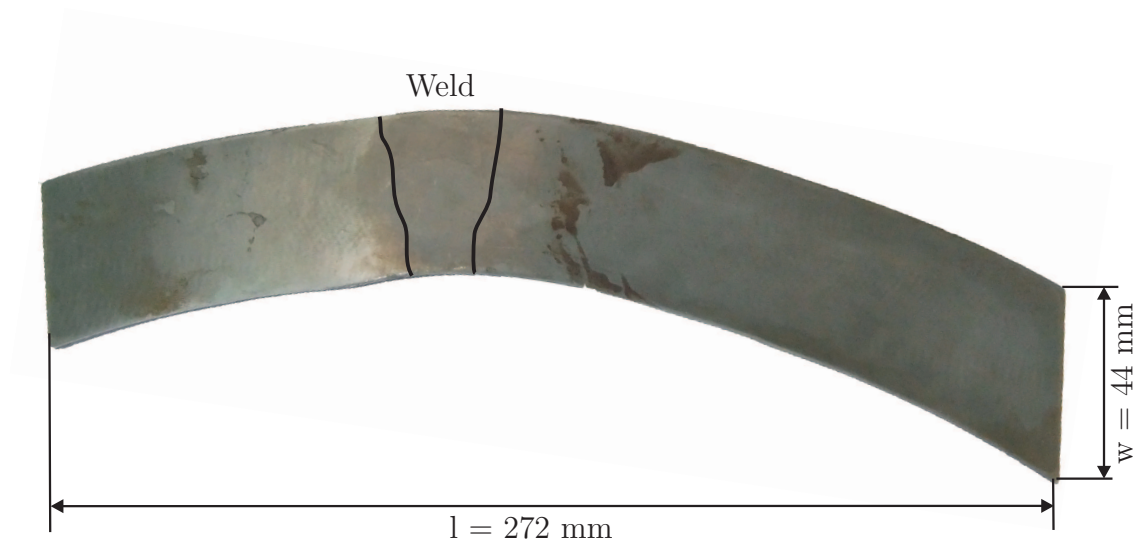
A335 P22 Steel Creep Specimen with Position of Weld.
